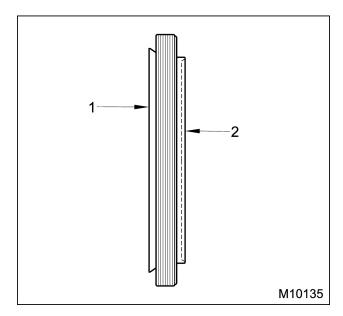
Crankshaft rear oil seal and wear sleeve assembly
